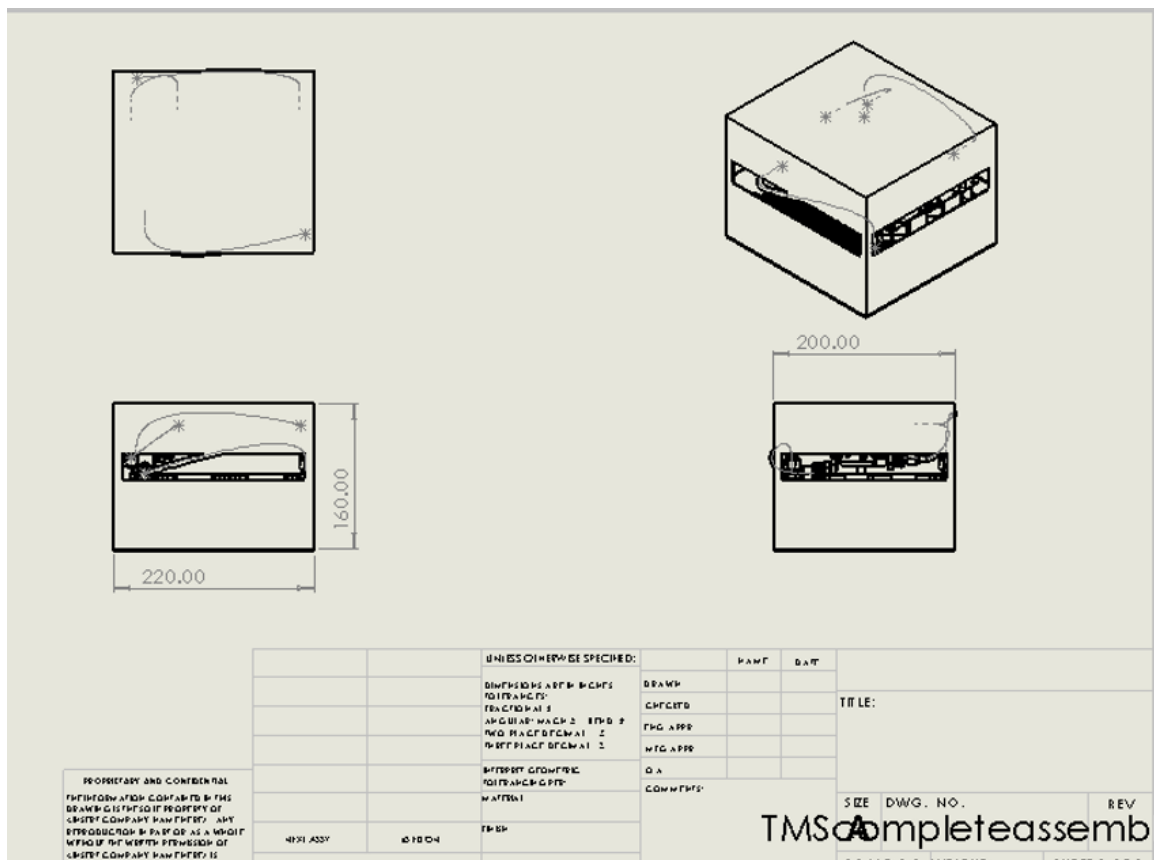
Image depicting power electronic module with a cooling module attached to the lower right section.
